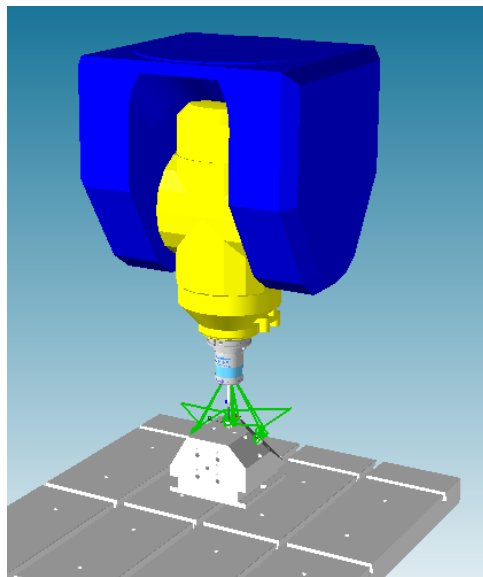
A0C180 Machine Spindle Measurement Orientation.
